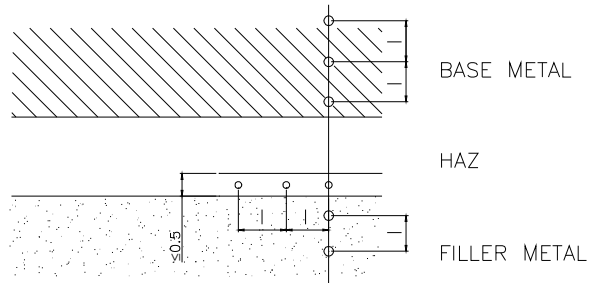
POSITIONS OF INDENTATIONS ON THE WELD SURFACE
